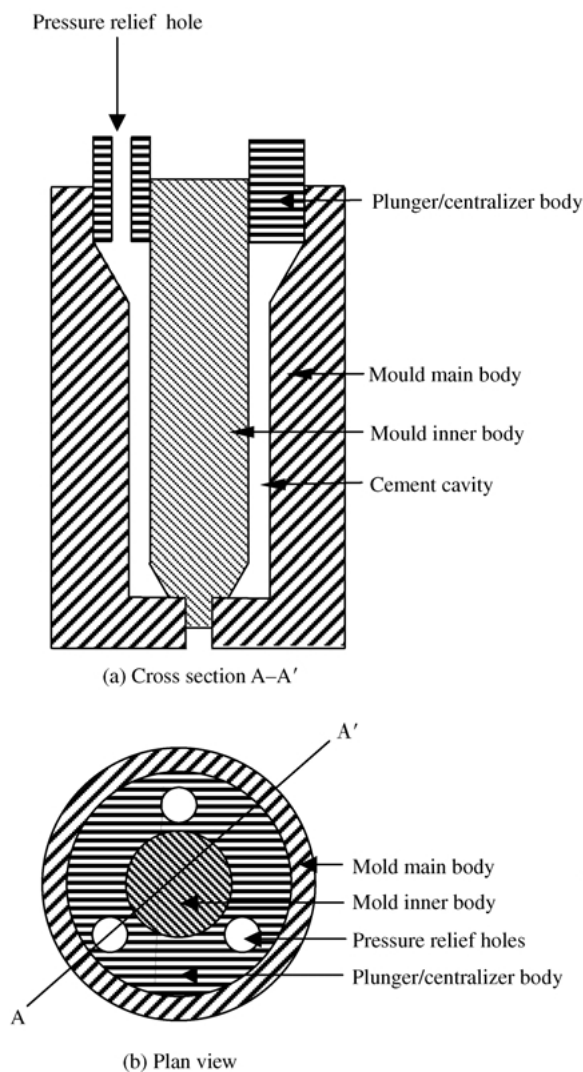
(a) Cross section and (b) plan view of the assembled mold for the multi-axial specimens. The clear section represents the area filled with cement.
